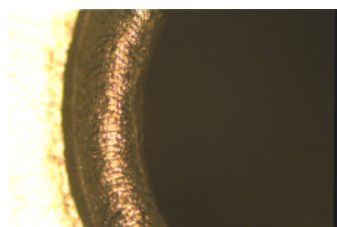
High quality welding seam between a cooling tube (right side) and the container (left side).
